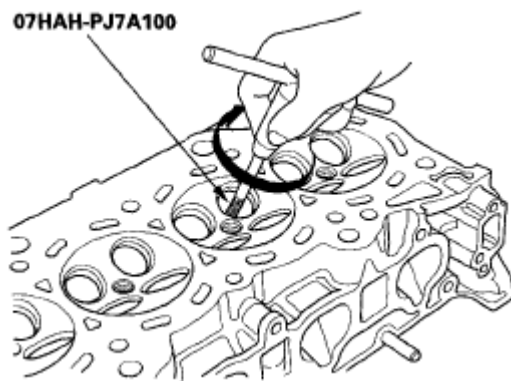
Rotating Reamer To Full Length Of Valve Guide Bore
